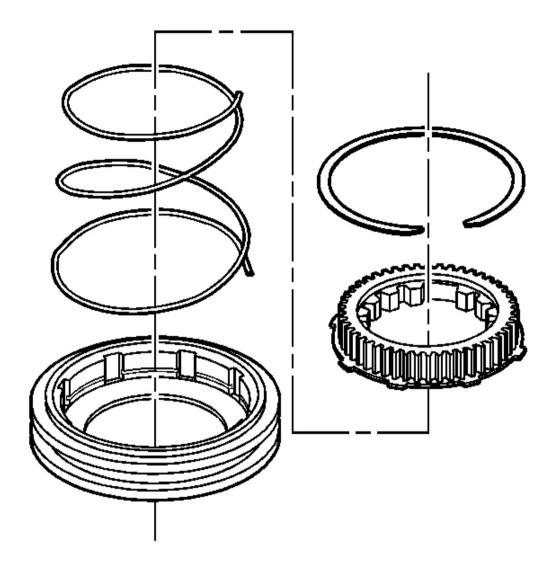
Lockup Shift Assembly Courtesy of GENERAL MOTORS CORP.
